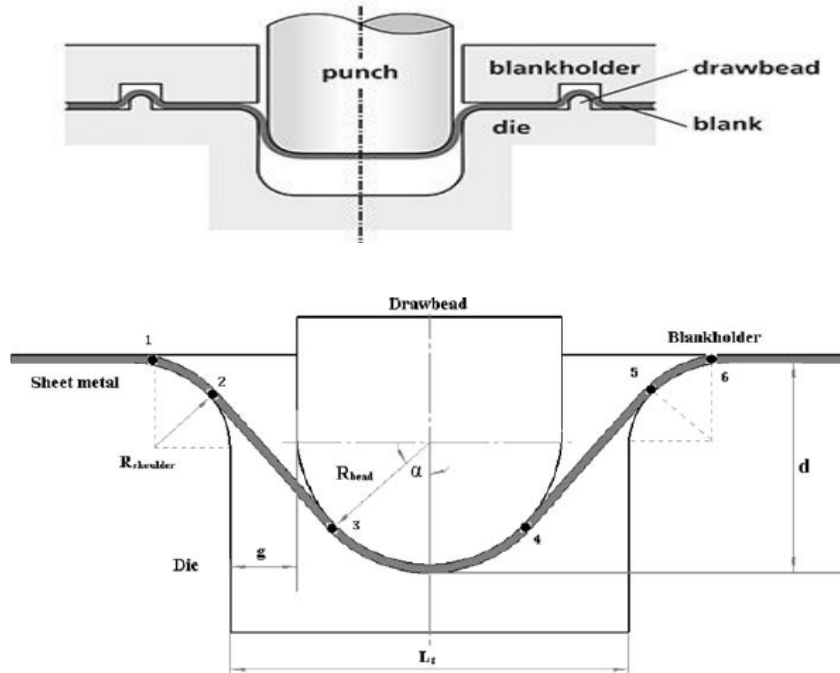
(A) draw bead location [8] (b) draw bead shape profile [9]
